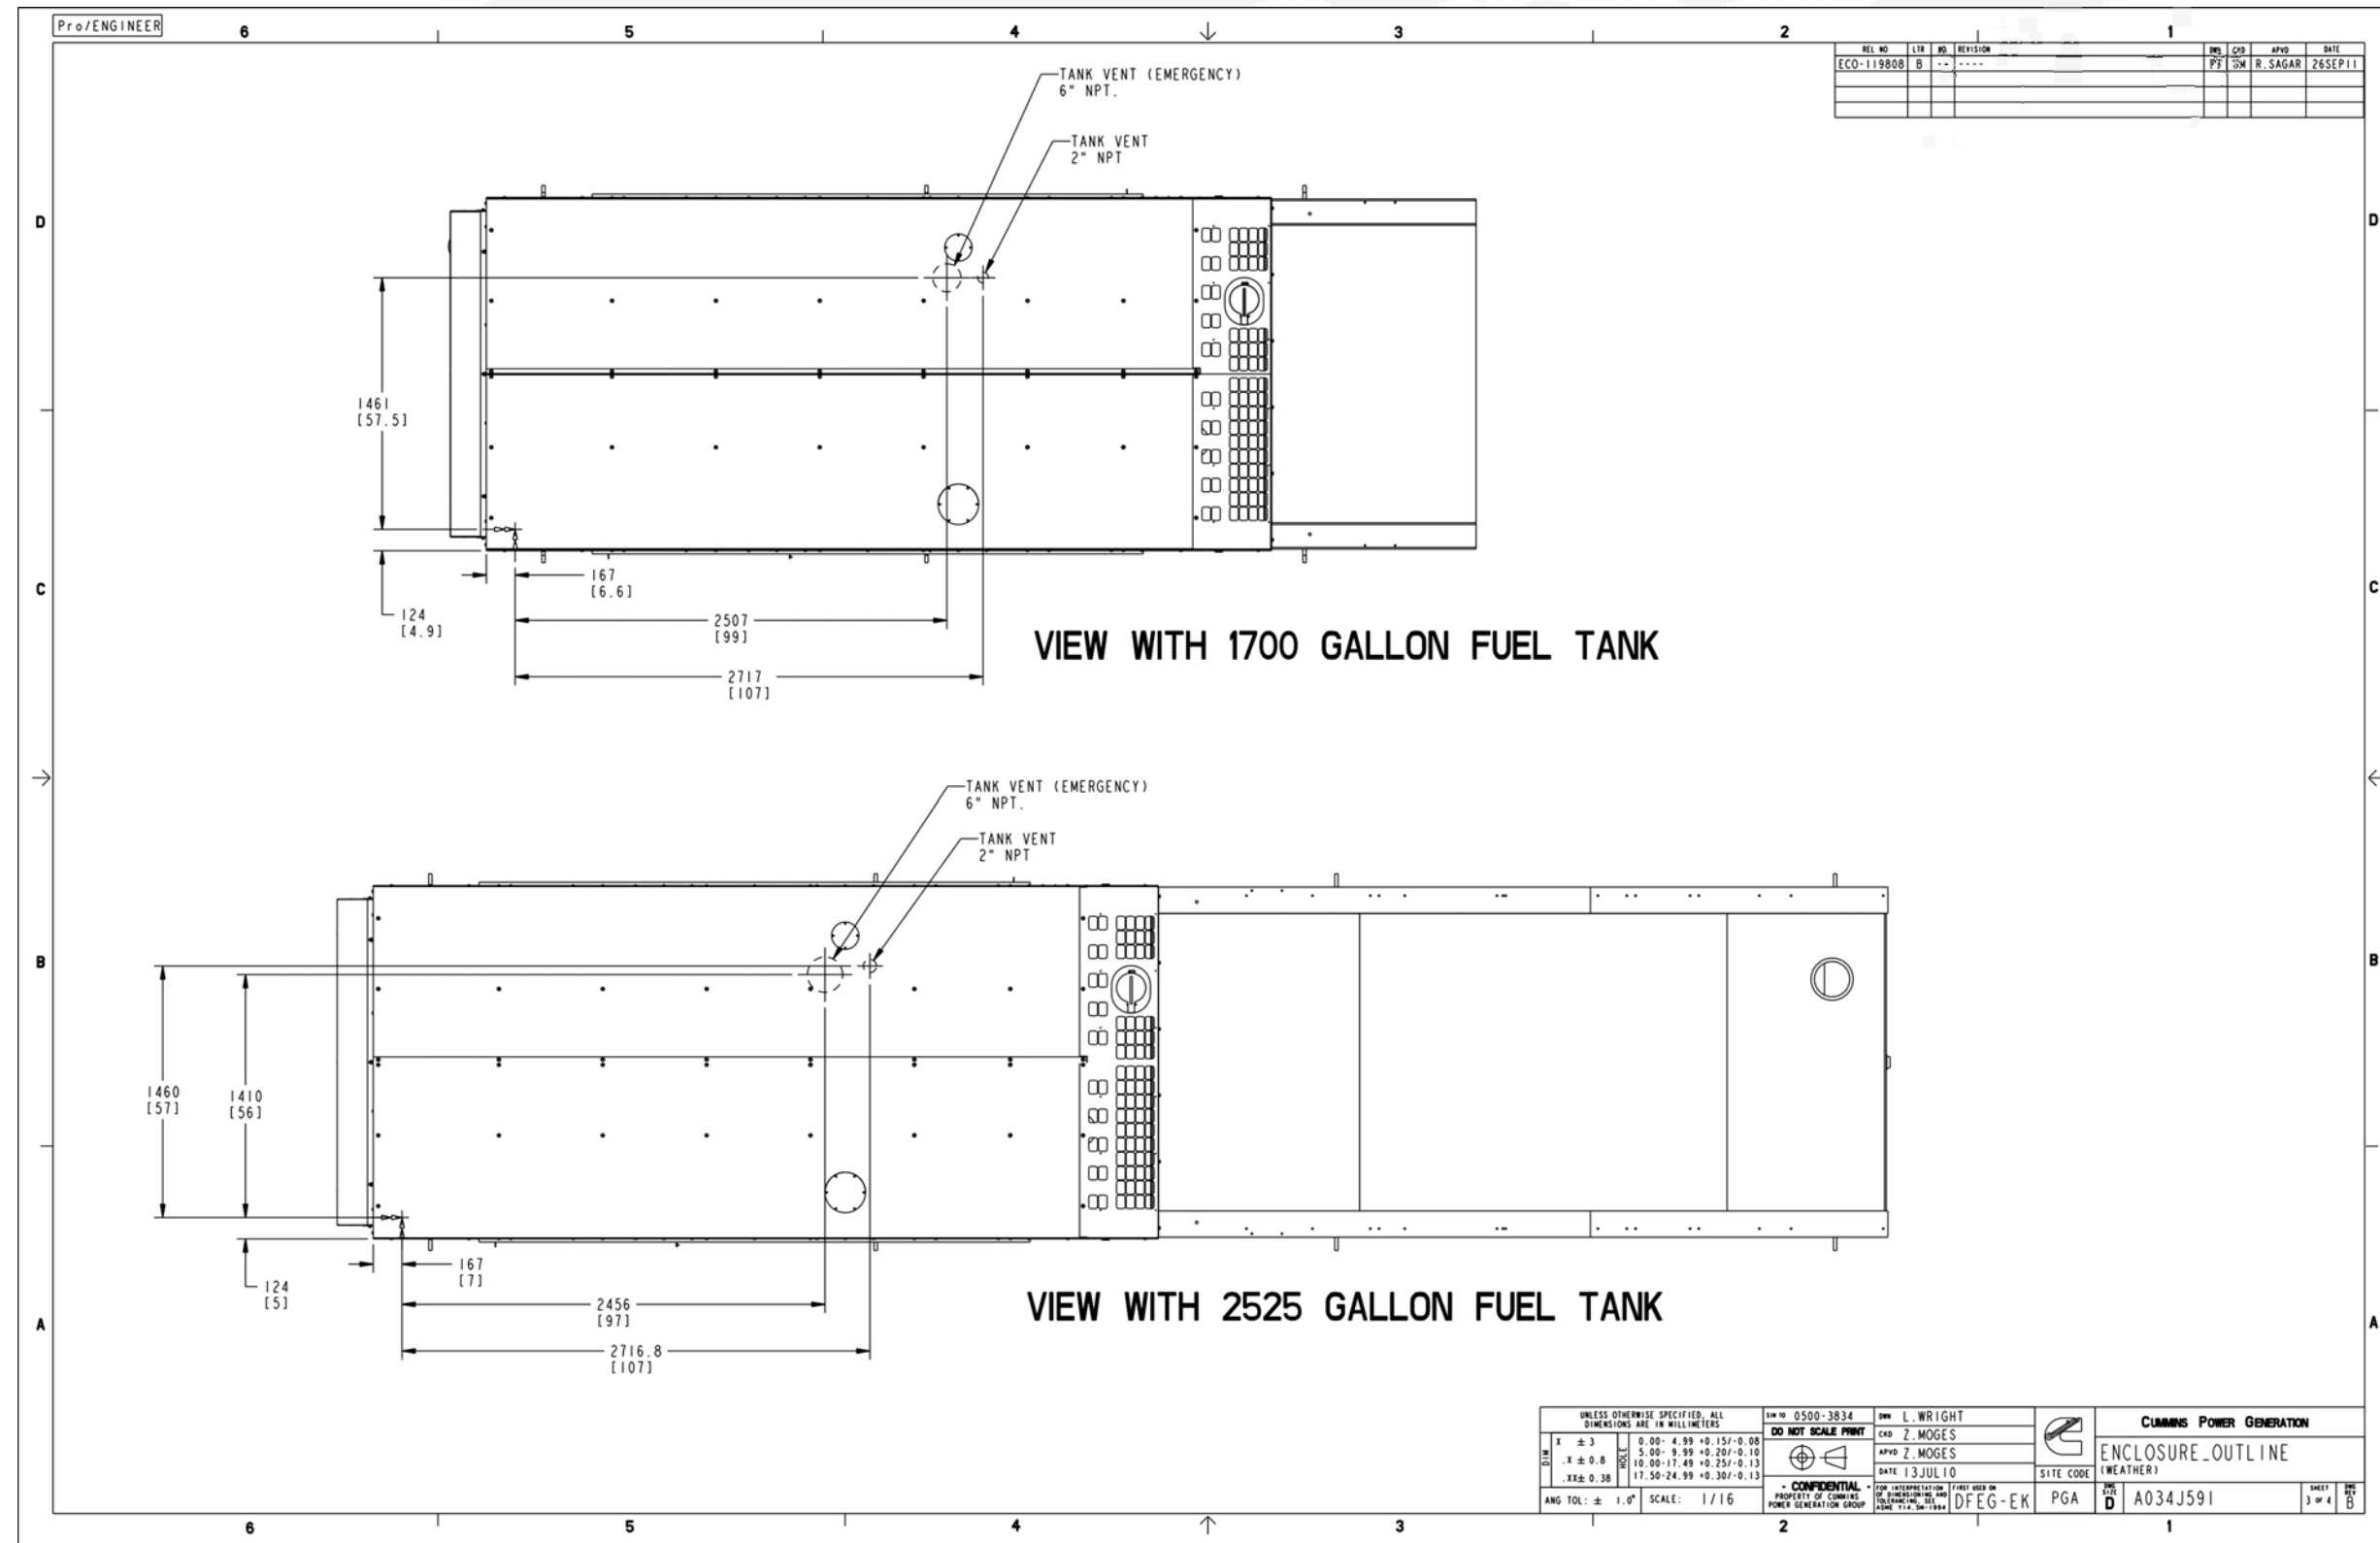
ENCLOSURE OUTLINE DRAWING (F200, F201, F203, F204, F206) (SHEET 3)
